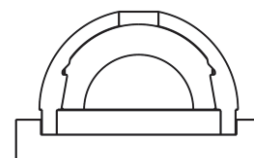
Cross-sectional view of acetabular cup and a testing base after redesigning
